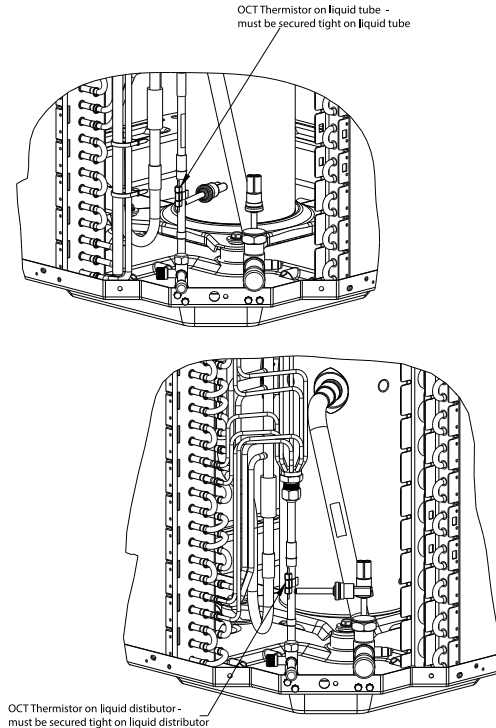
Outdoor Coil Thermistor (OCT) Attachment
